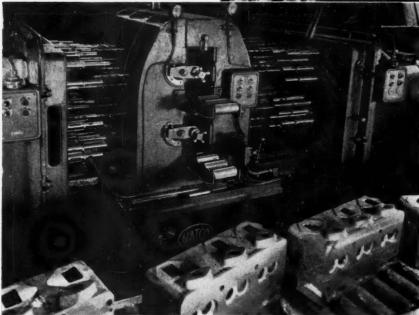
Tapping Holes in Top and Side of Crankcase. Angle Hole is Drilled and Reamed with Auxiliary Unit
